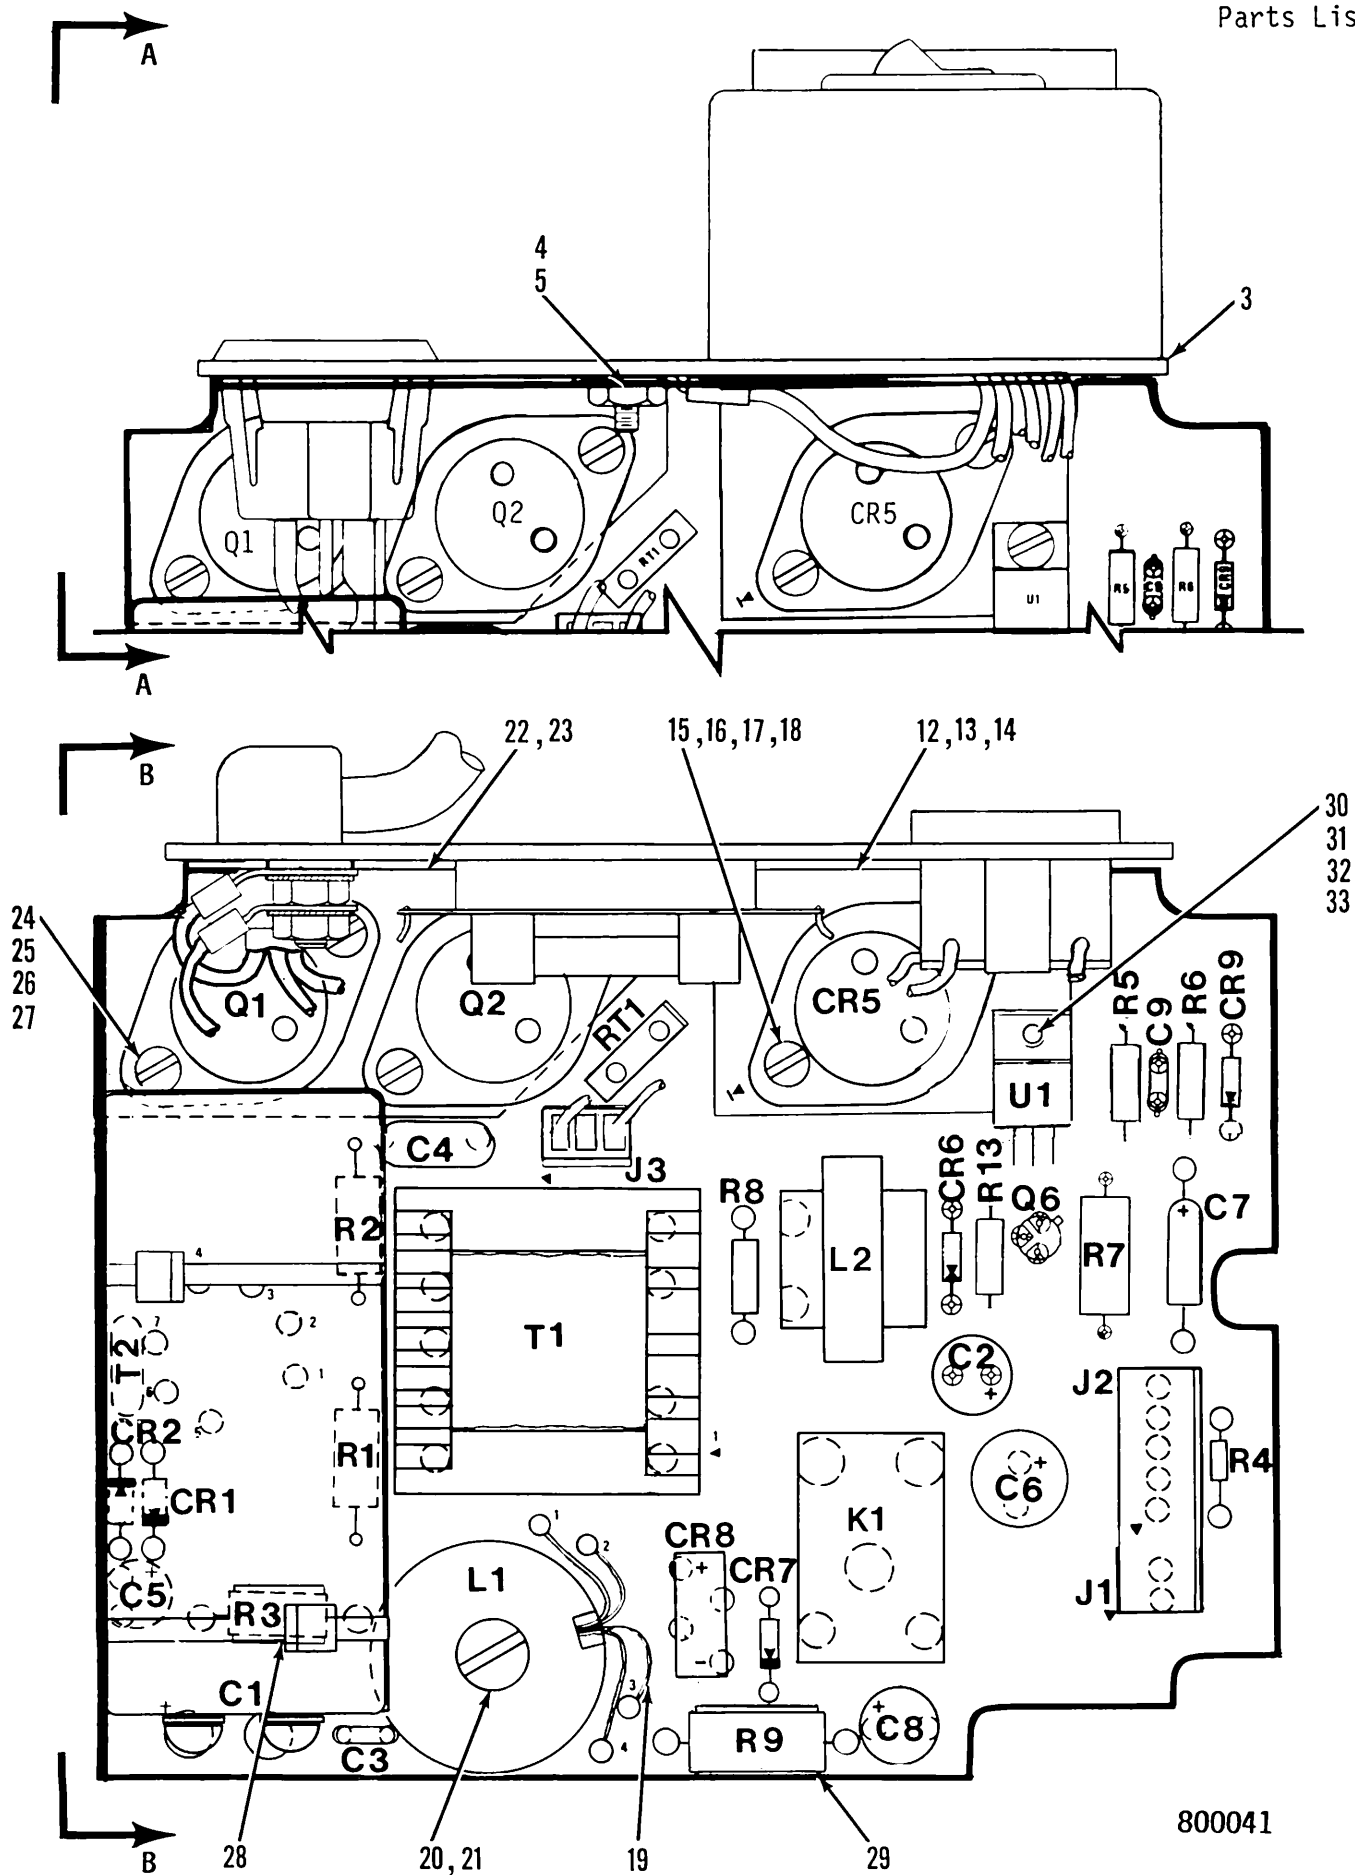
A. CHARGER PCB ASSEMBLY, DEFIB
